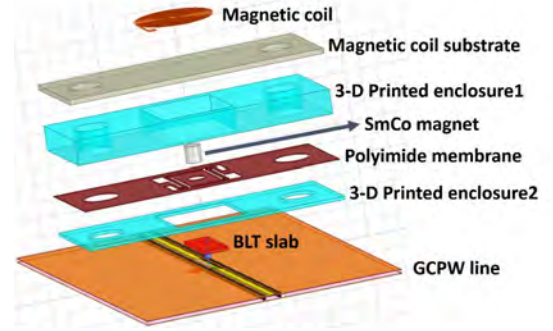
Exploded 3-D view of phase shifter with magnetic actuator and 3-D printed enclosure.
